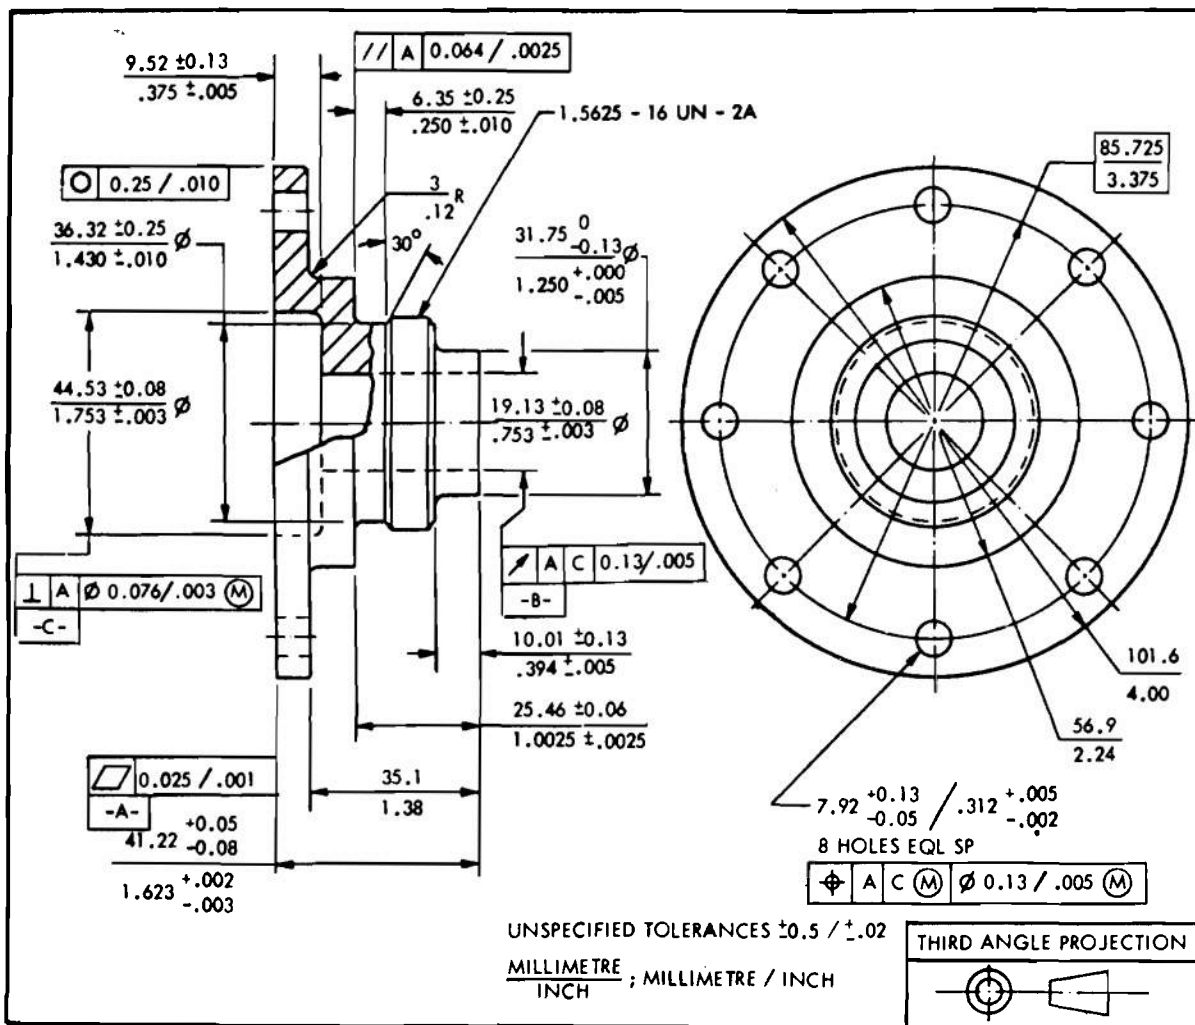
Dual Dimensioned Drawing Using Position Notation (Ref. 1)
